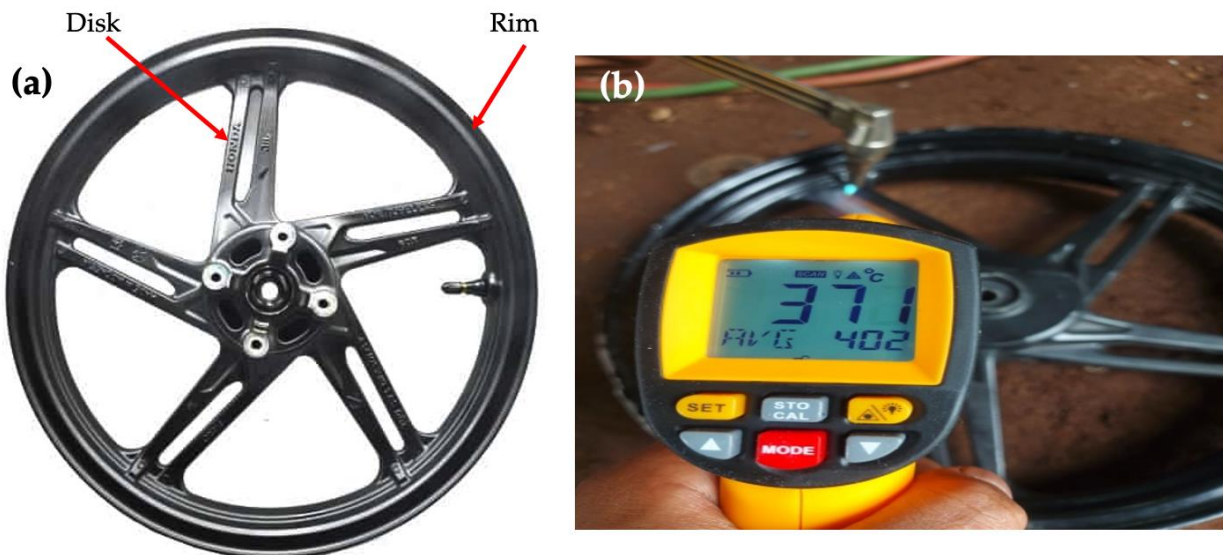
(a) Original equipment manufacturer (OEM) casting wheels, (b) wheels reconditioning heating temperature measurement process
